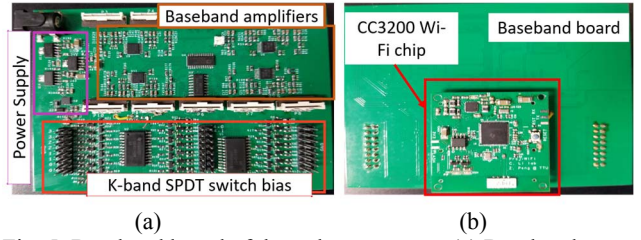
Baseband board of the radar prototype. (a) Baseband board front-side. (b) Wi-fi board connected on the back-side.
